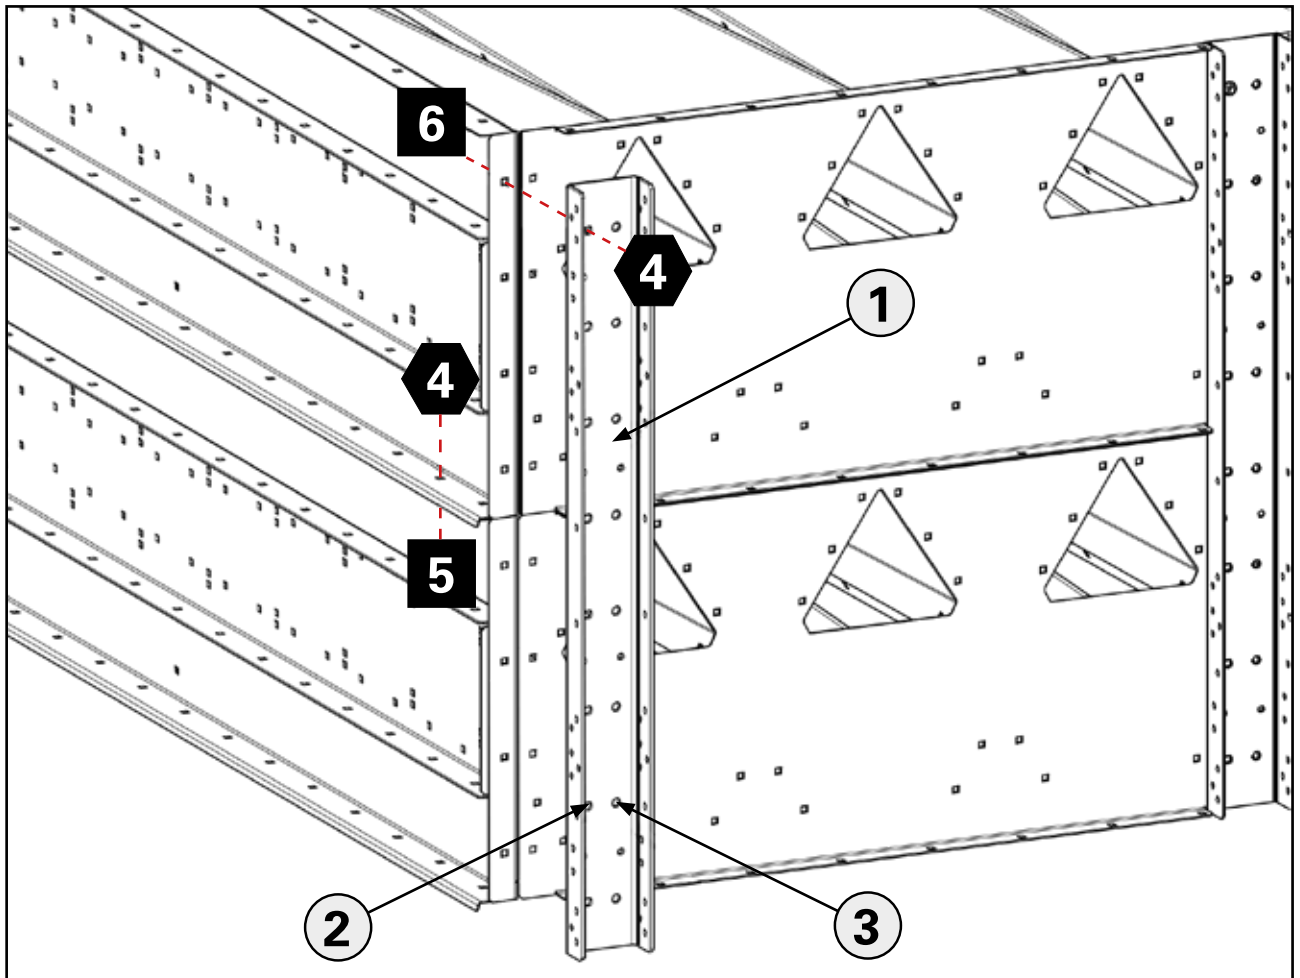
Attaching the heavy model drying cell short wall and bracing
